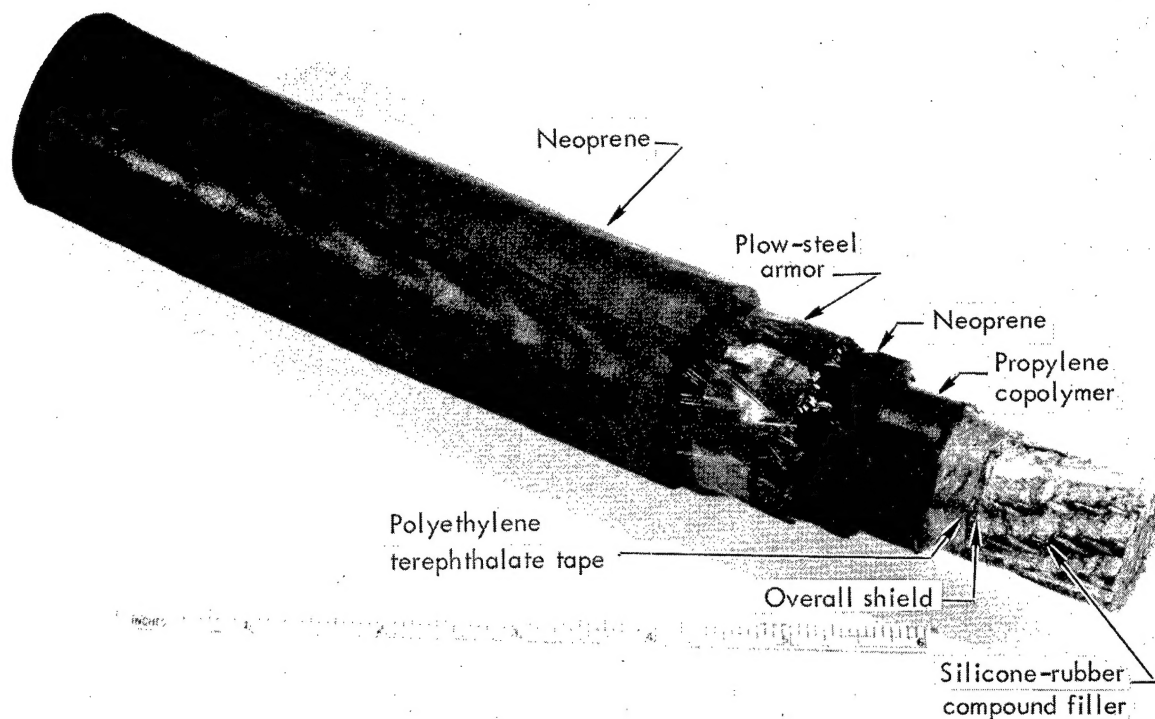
Cutaway view of Gasbuggy arming and firing cable.
